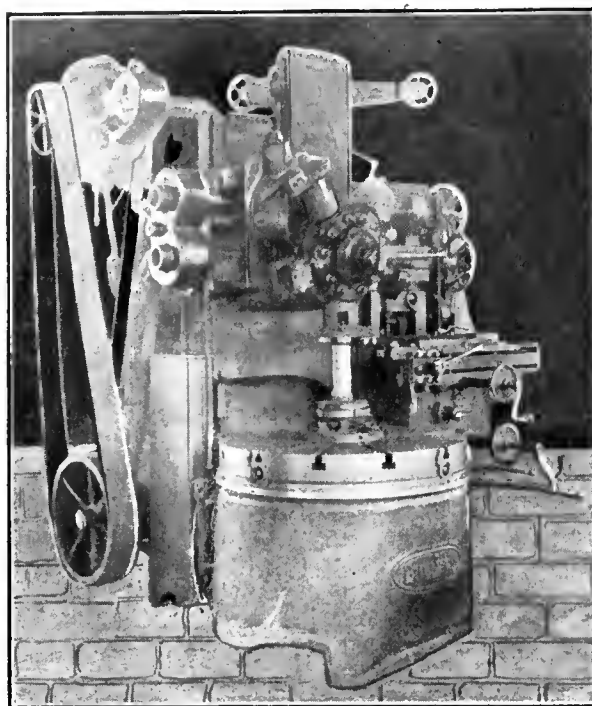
"BULLARD" VERTICAL BORING MILL TOOLED-UP FOR ROUGH TURNING SHELLS.
